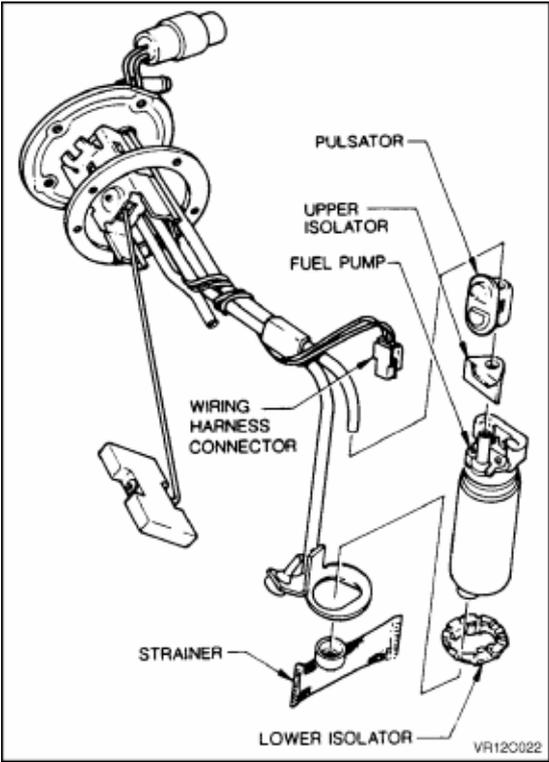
C2-1-85 In Tank Fuel Pump Assembly
